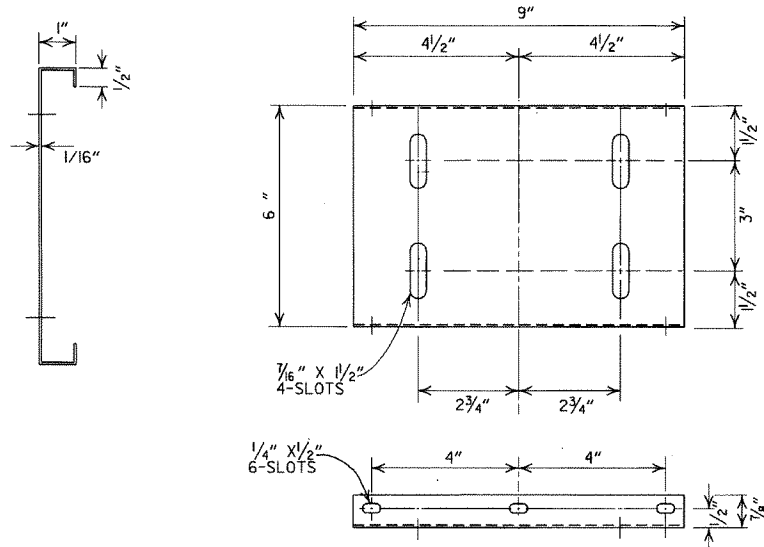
DETAIL OF TERMINAL ANCHOR POST (TYPE I)
